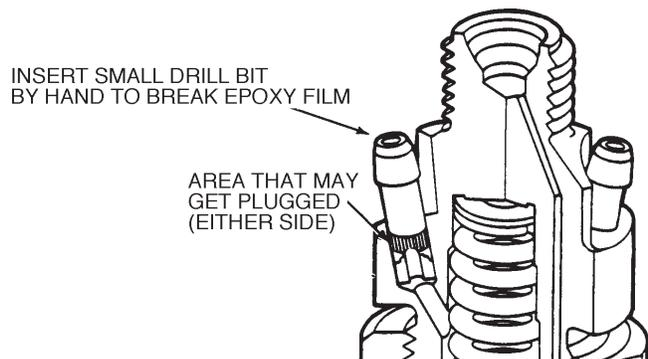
Fuel Injection Nozzle Blockage Check.
